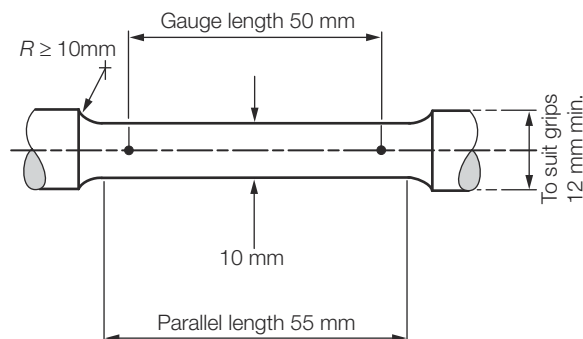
Test specimen for deposited weld metal tensile
